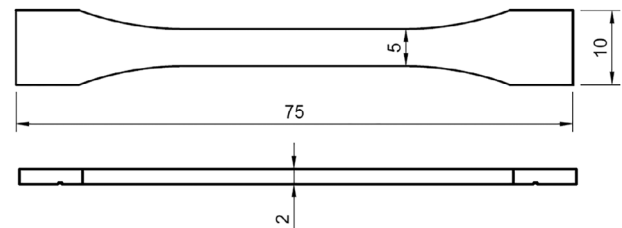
| Technical drawing of specimen type 1BA according to DIN EN ISO 527-2 (dimensions in mm).
